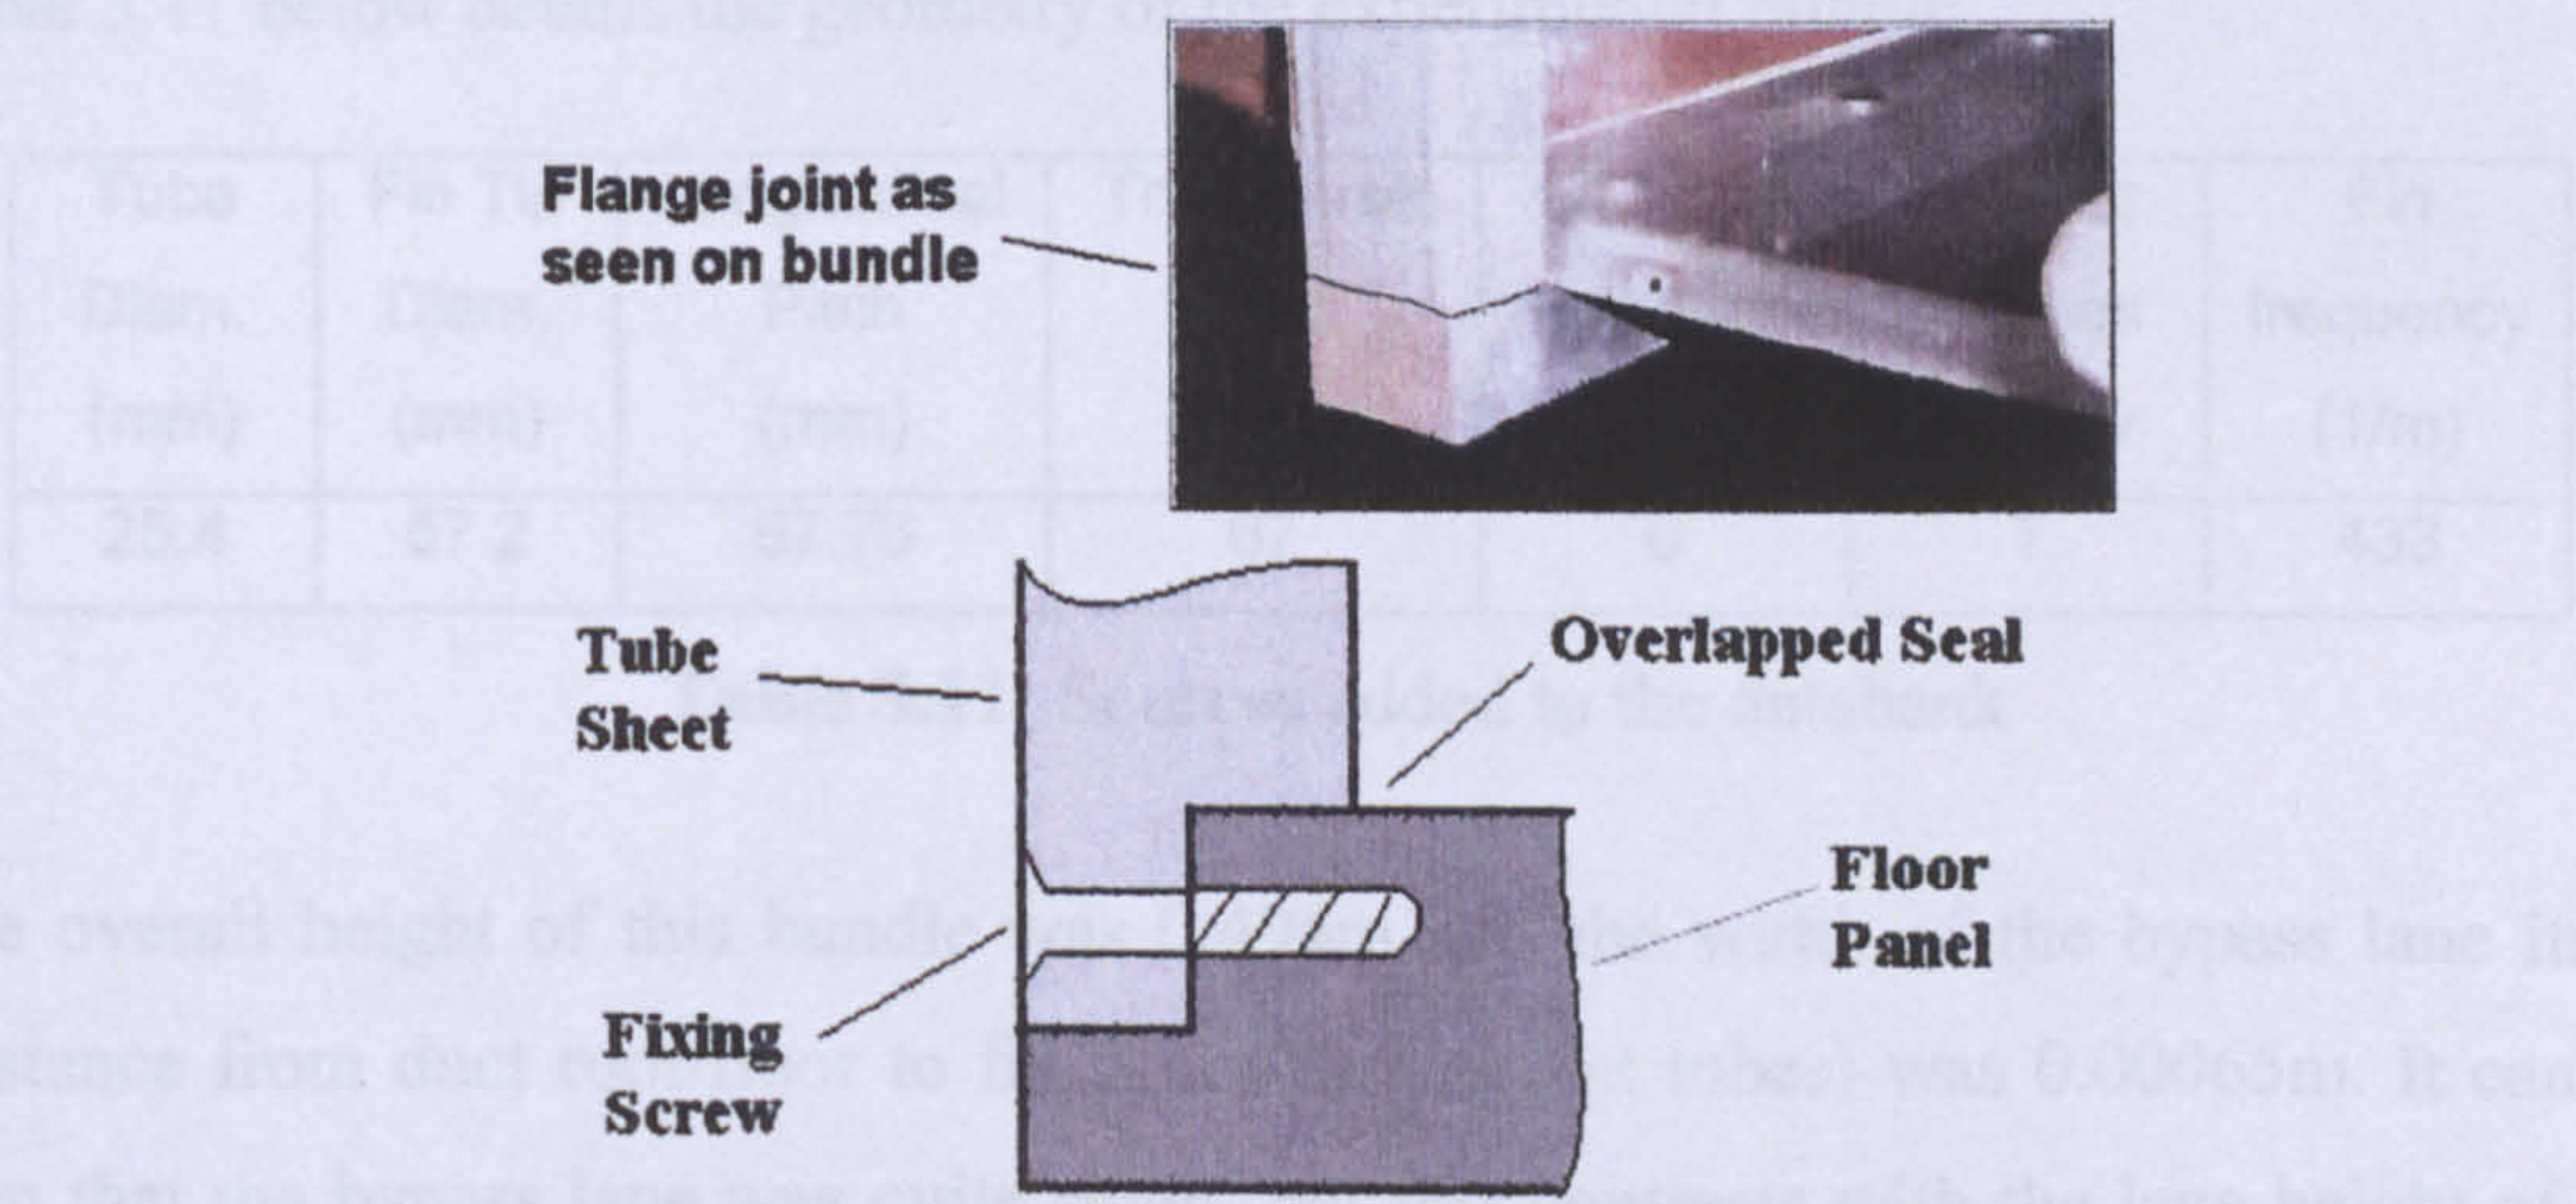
Schematic and picture of tube sheets to floor/roof sealed joint
